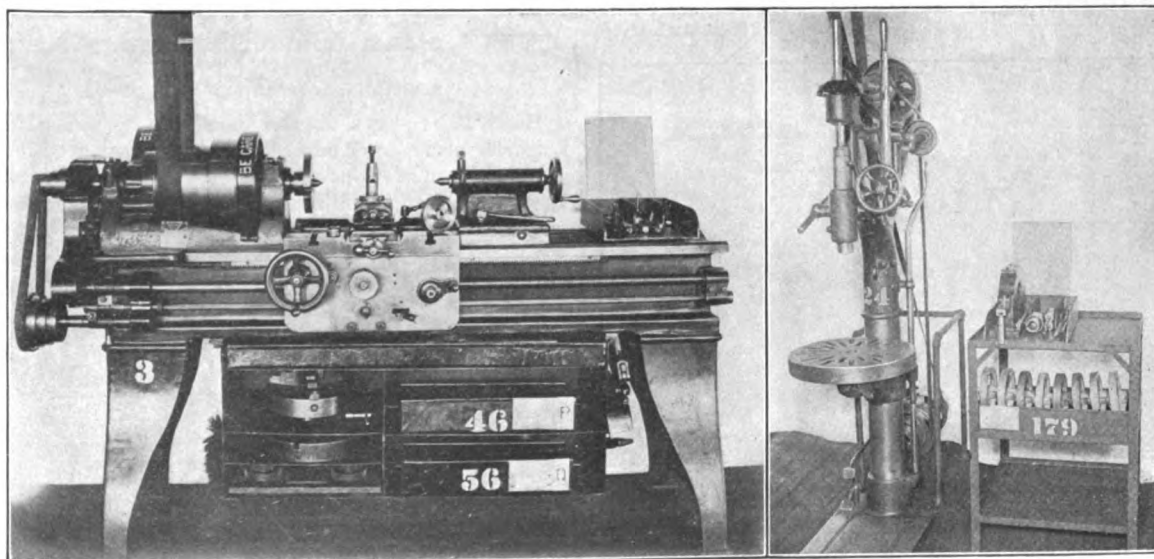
TOOL TRAYS AND MATERIAL AT ENGINE LATHE AND DRILLING MACHINE
